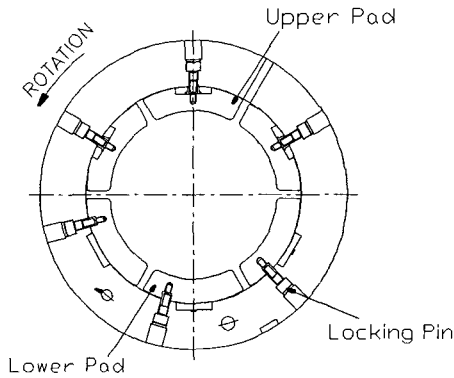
LOP type 6-pad tilting pad journal bearing for a steam turbine
